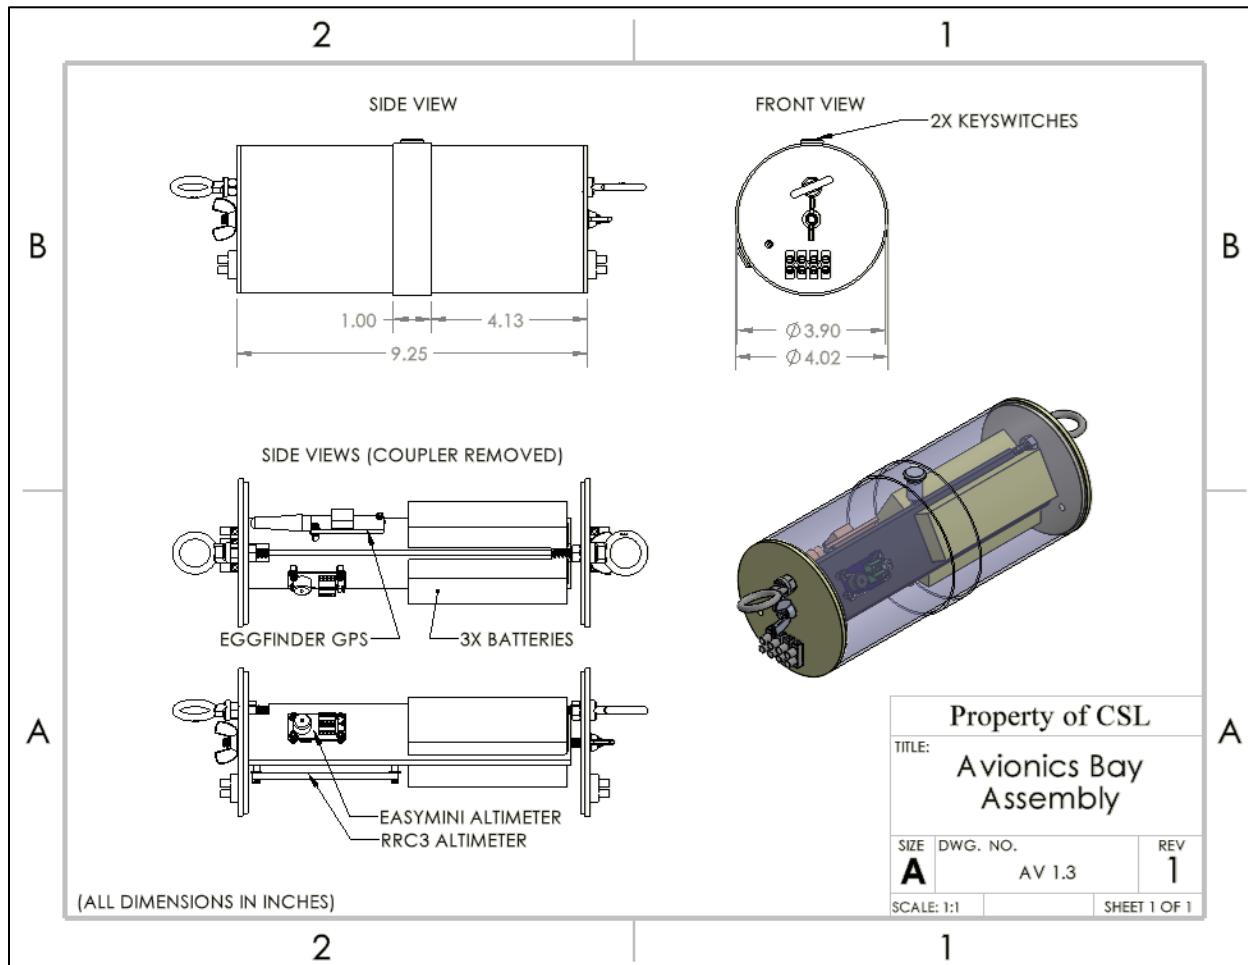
SolidWorks drawing of the avionics bay final design.
